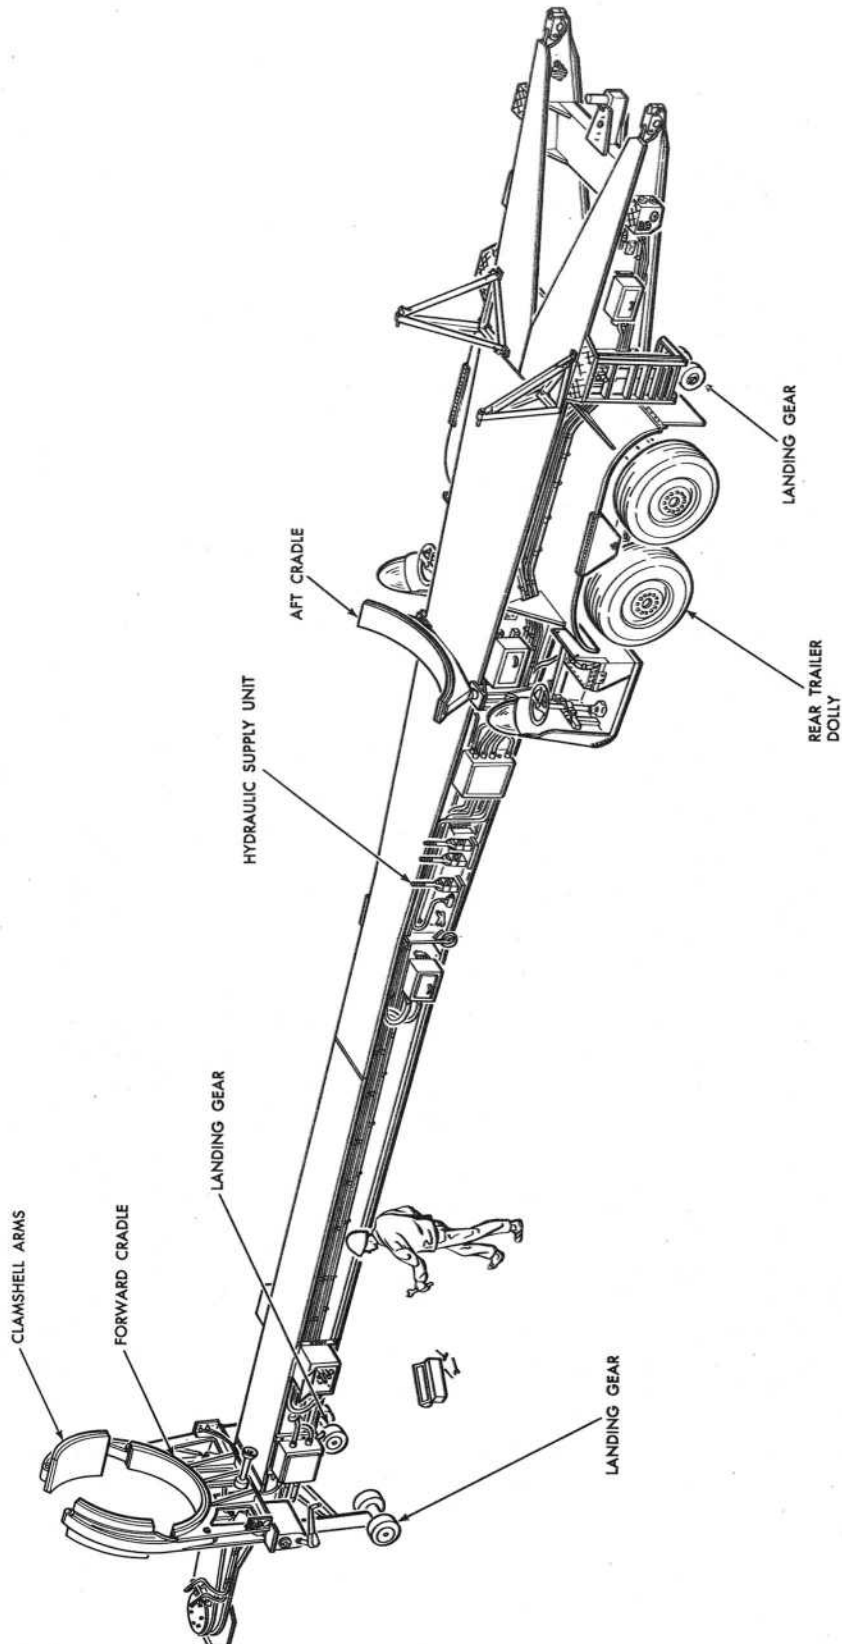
Erecting-Transporting Boom and Rear Dolly
